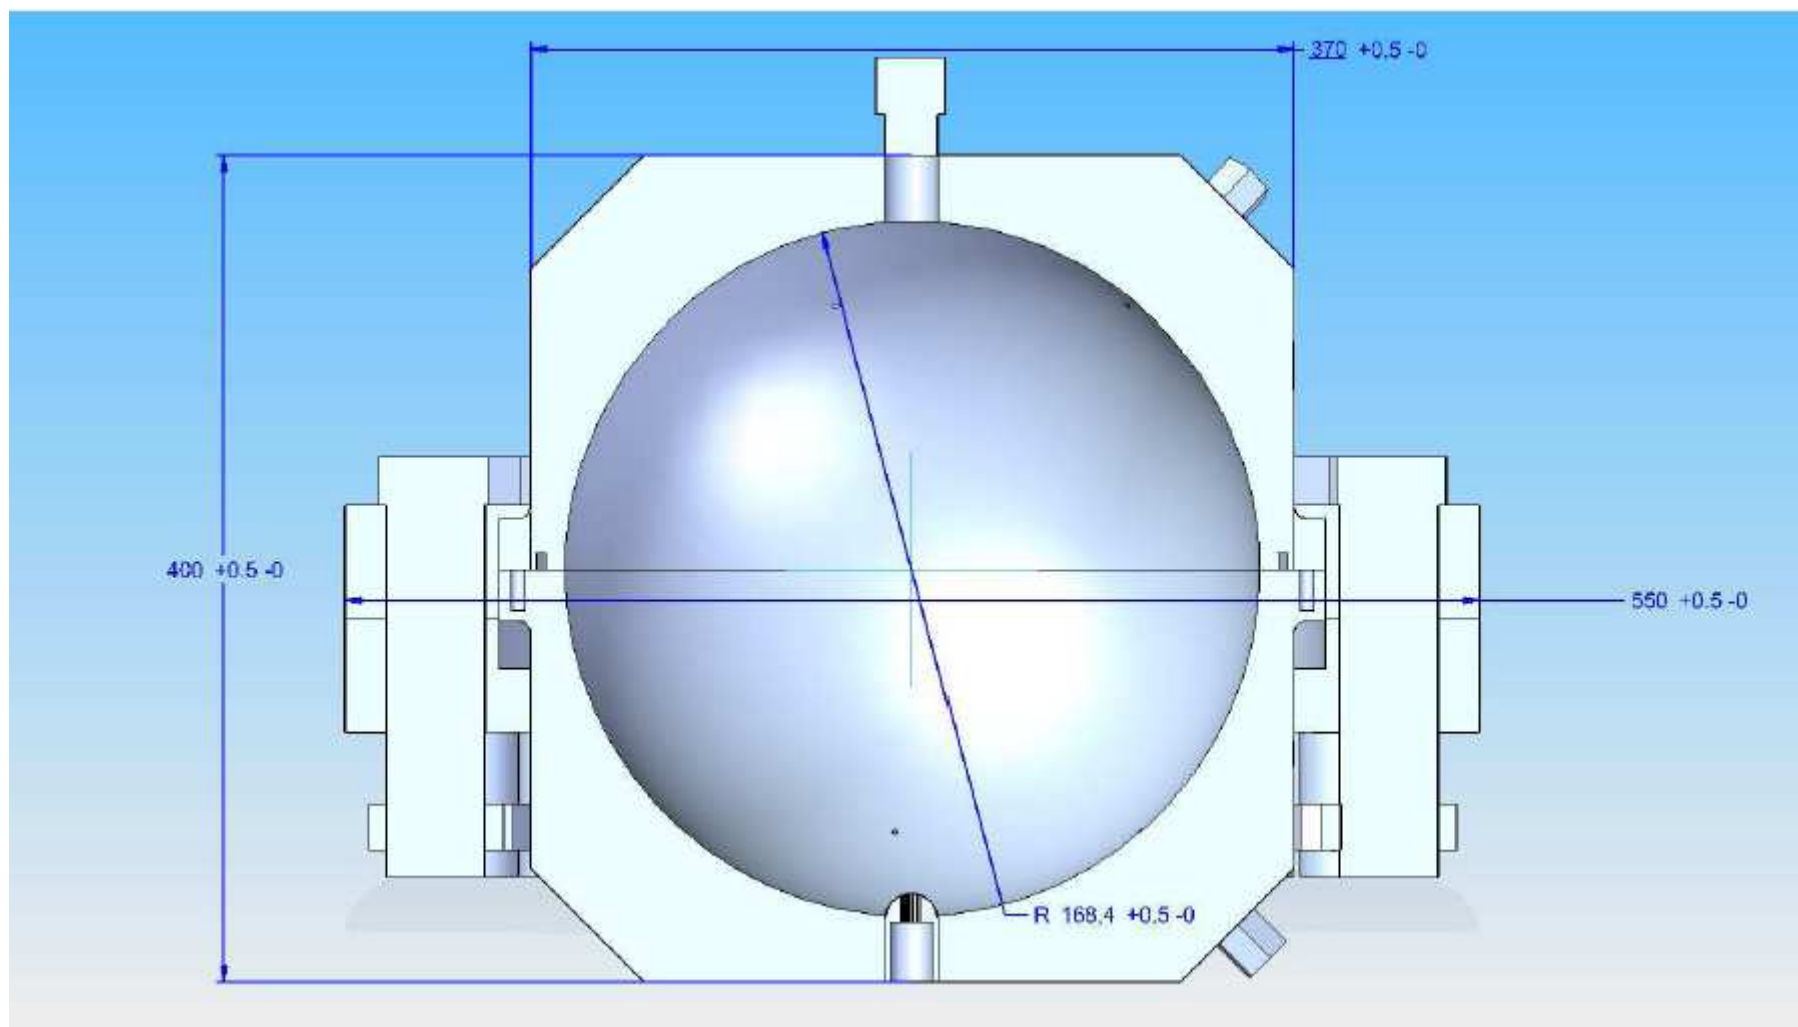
Cross-section of R-20 ignition chamber with key dimensions
